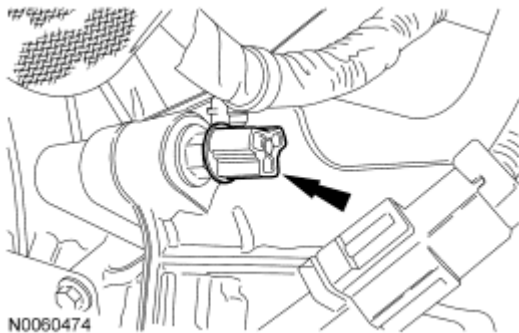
Locating Wiring Harness Retainer From Stud Bolt
